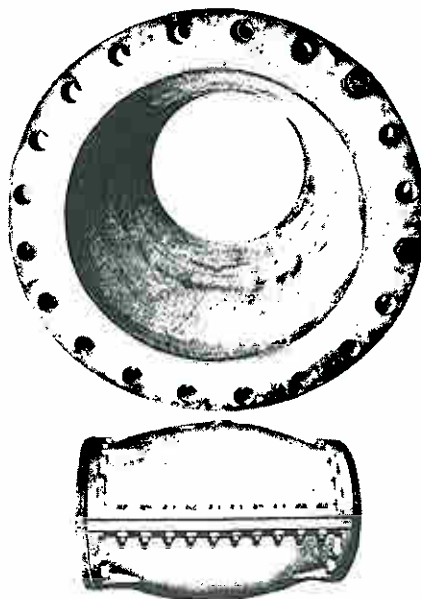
A jacket-actuated pinch valve has a "clean-thru" bore. There are no internal or external parts in the valve which can cause a maintenance problem.
